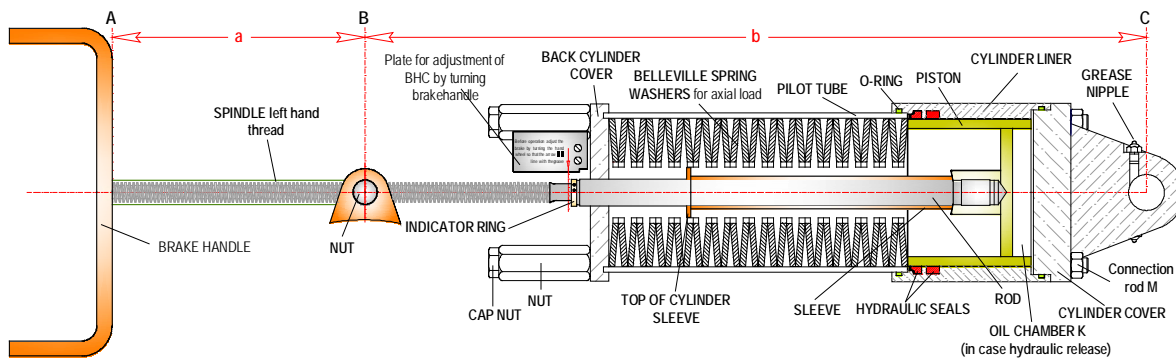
Spring-applied brake (Belleville washers) showing the band brake applied (brake handle-spindle-nut no to scale). In this Fig., the spring is formed by 32 Belleville washers stacked in series. Source: TTS Kocks GmbH, Bremen.
